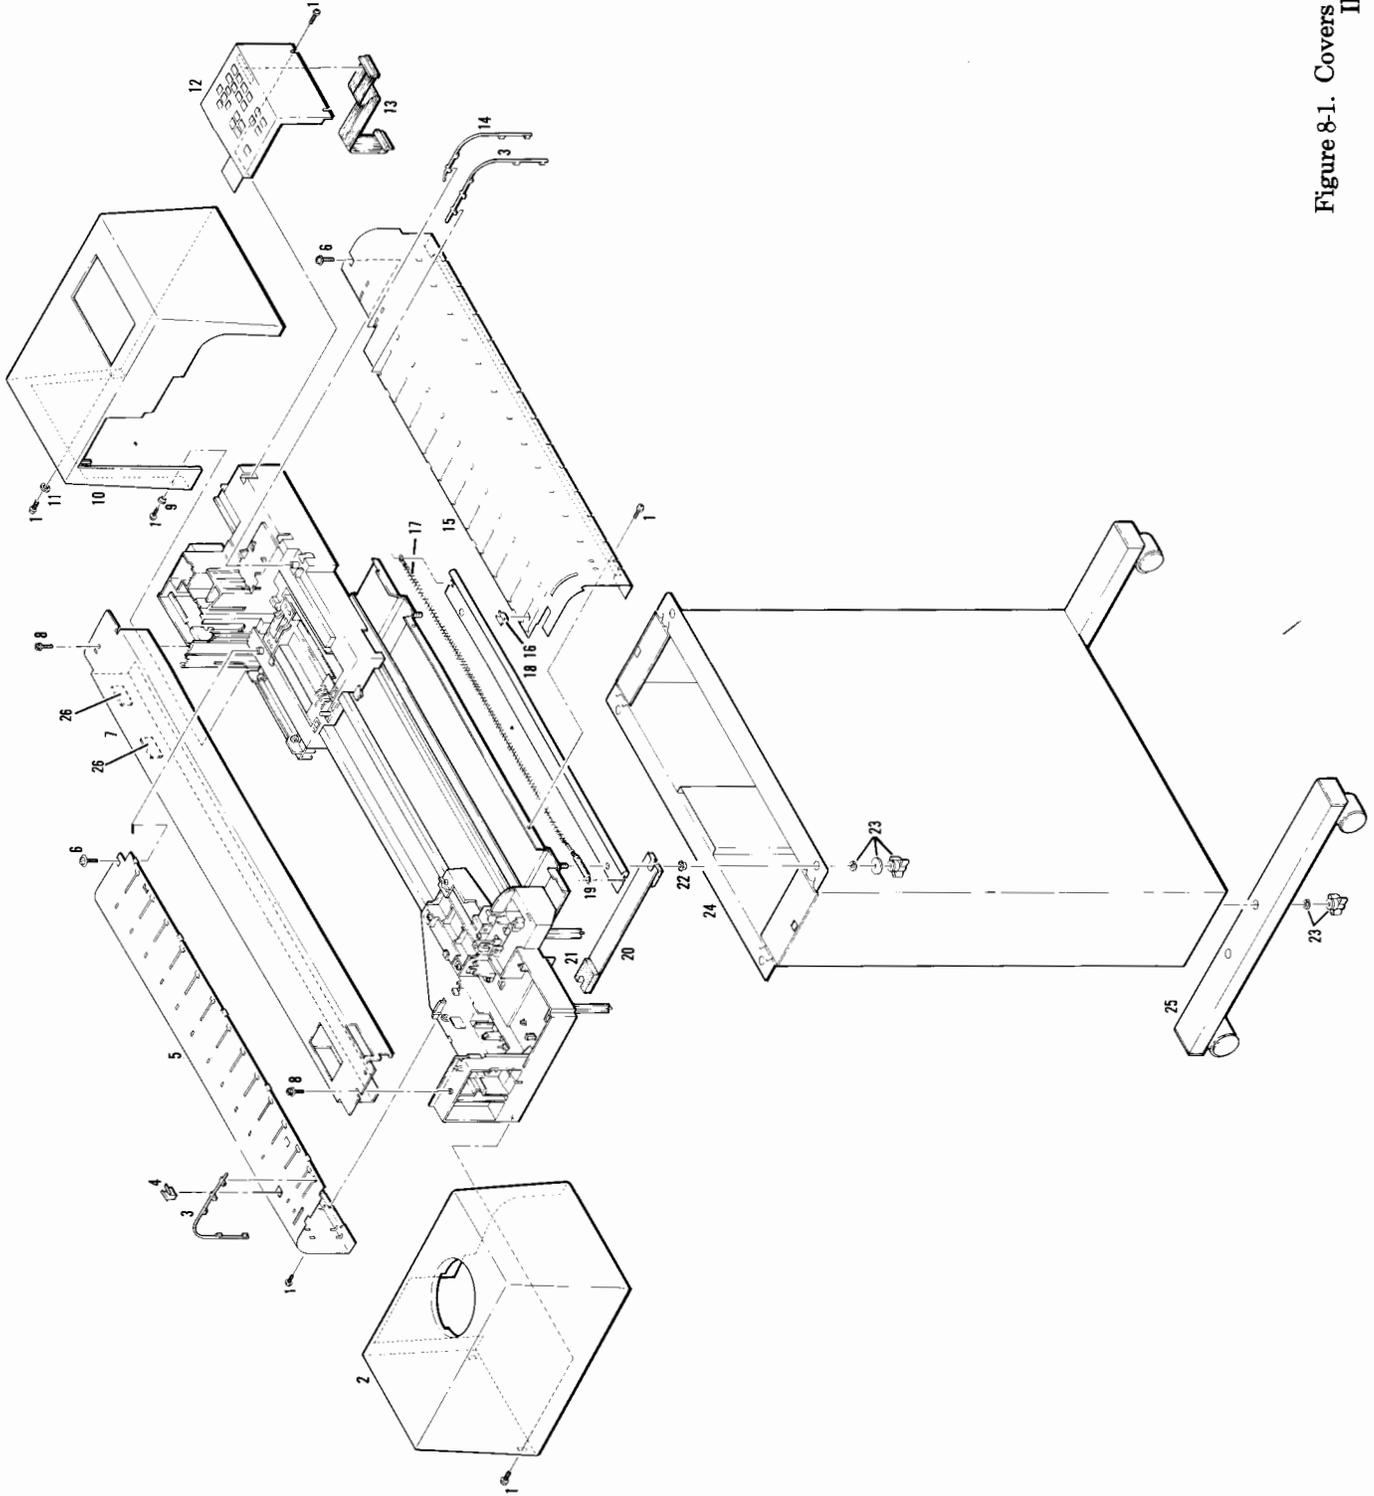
Covers and Chassis Assemblies, Illustrated Parts Breakout
